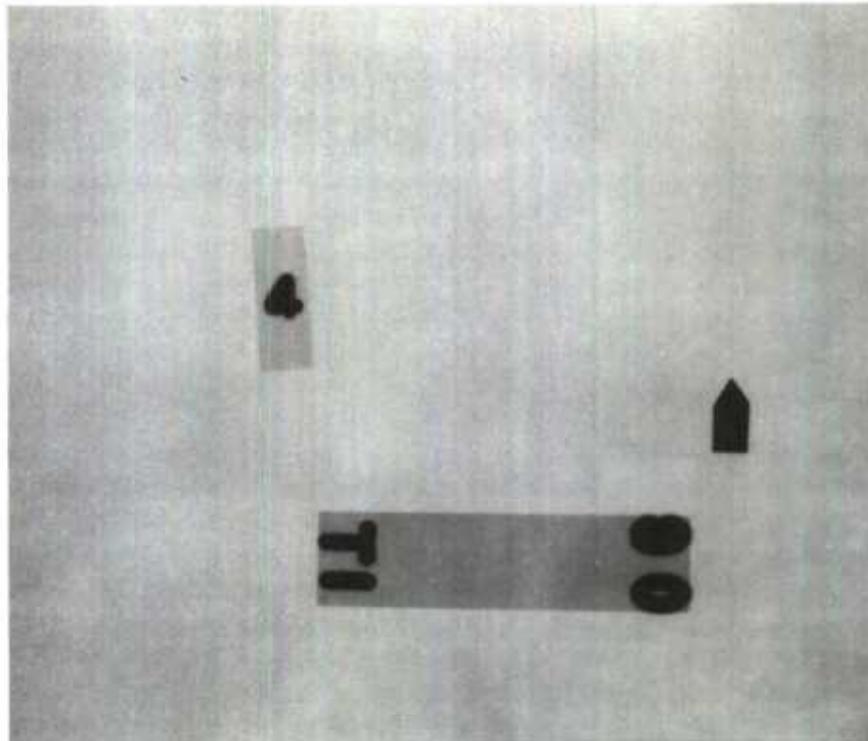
Radiograph of Fusion Welded Fatigue Specimen
